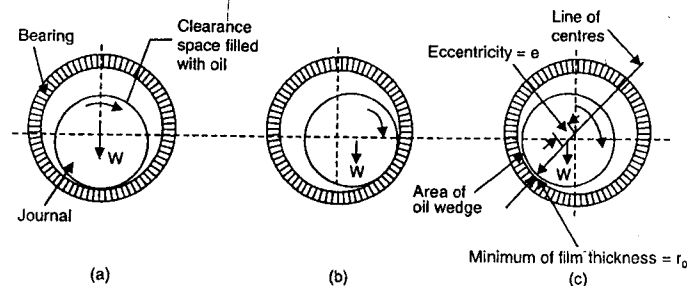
Behaviour of a journal rotating in a bearing.
